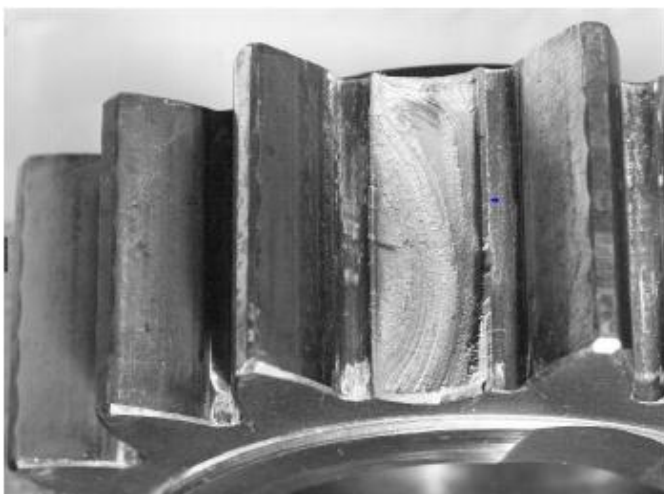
Vibration fatigue failure in a spur gear
